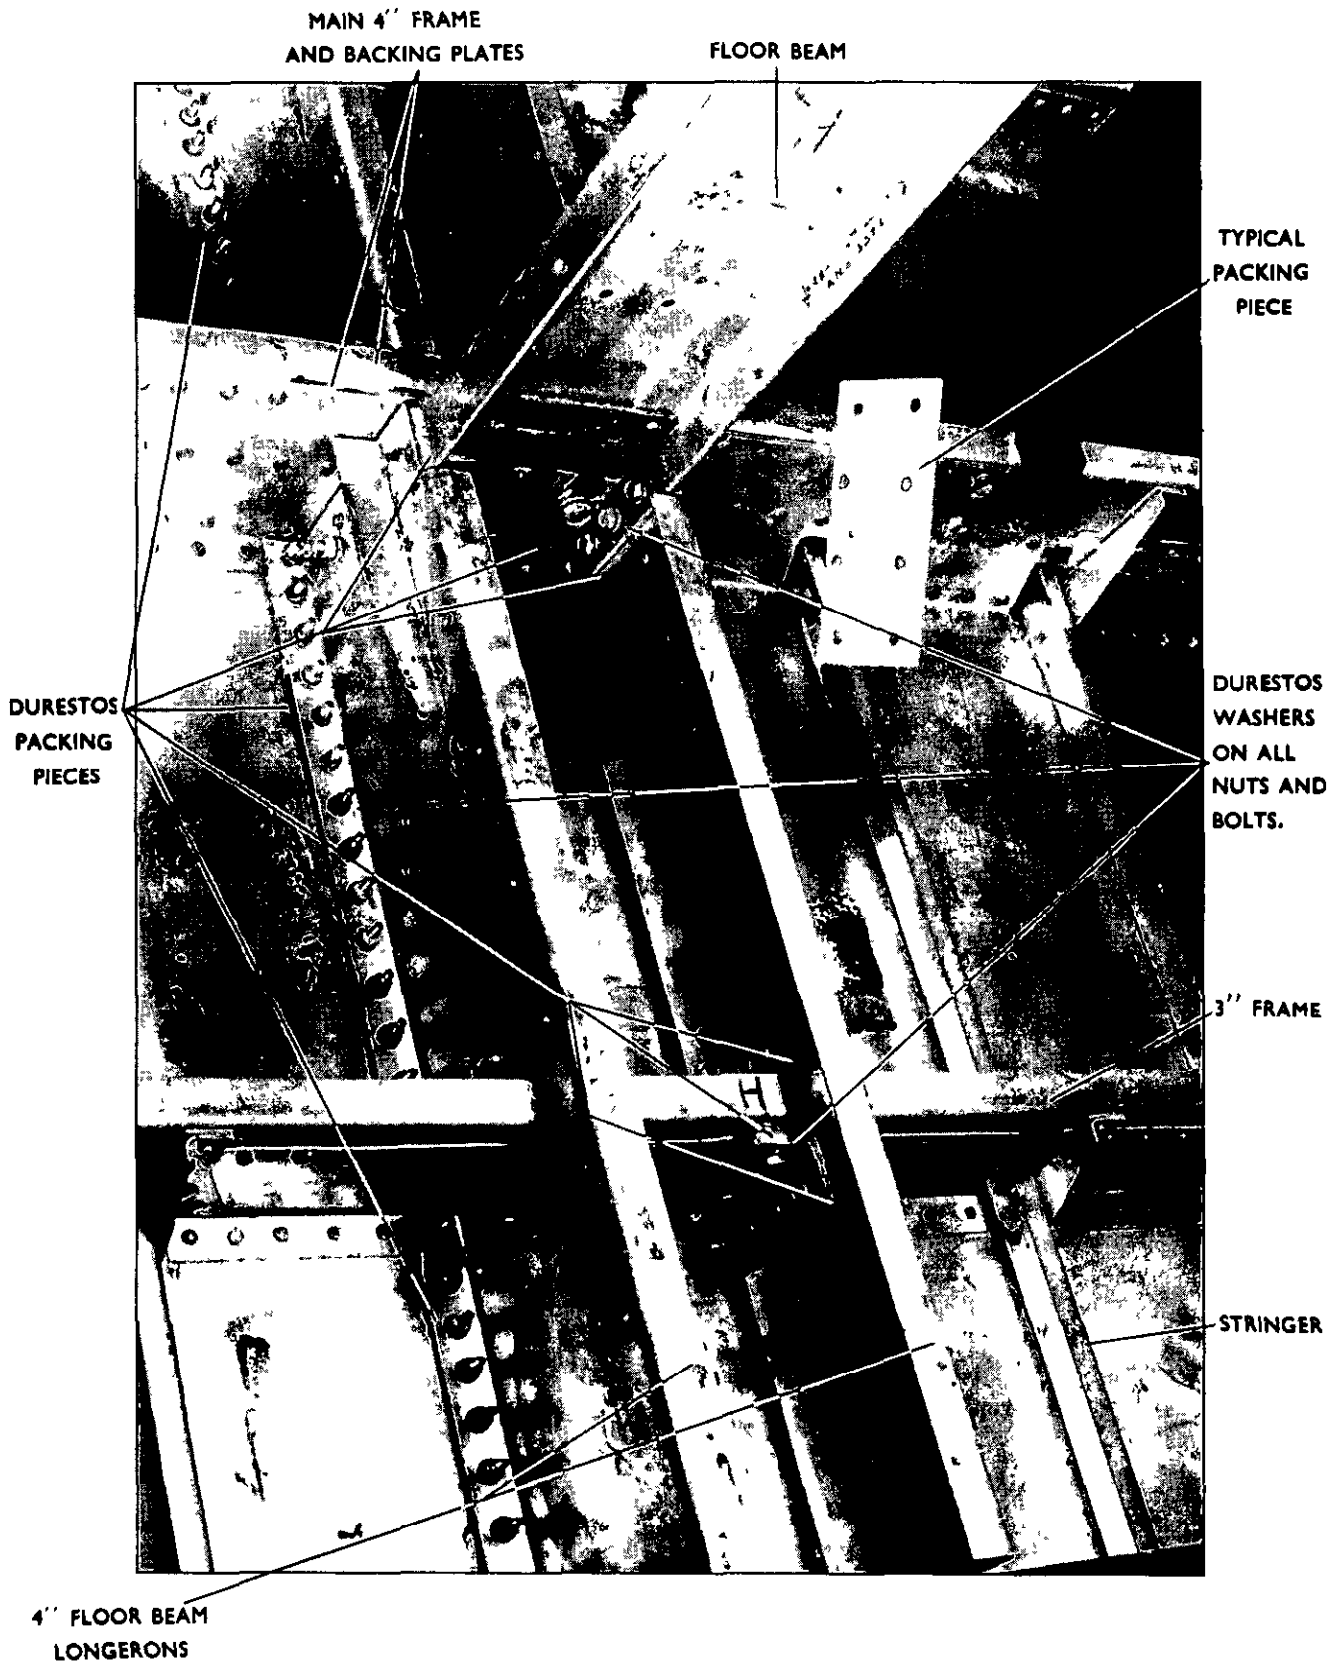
DETAIL OF MODIFIED FLOOR BEAM PANEL
